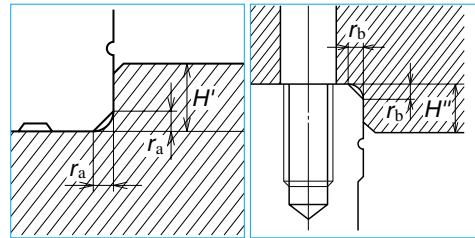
Shoulder for the rail datum face Fig. II-9-11 Shoulder for the ball side datum face
